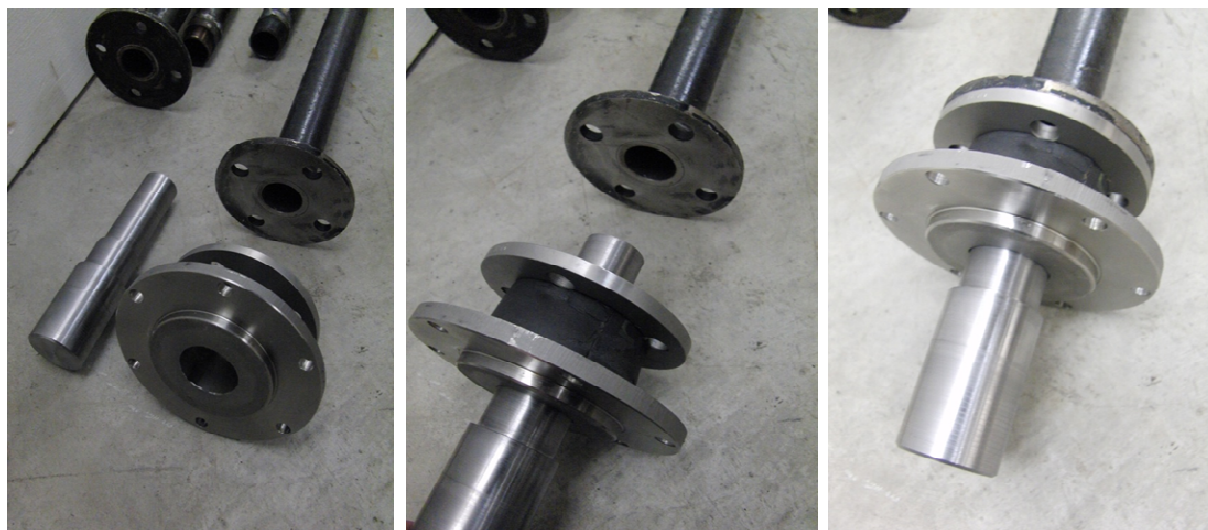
Method for using locator shaft to connect the contraction adaptor piece to the test section
